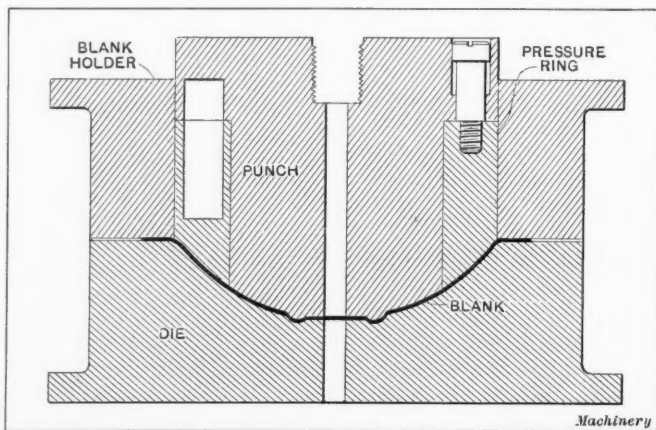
Final Step in the Operation, the Punch descending within the Pressure Ring to form the Bottom, leaving Blank as shown in Fig. 3
